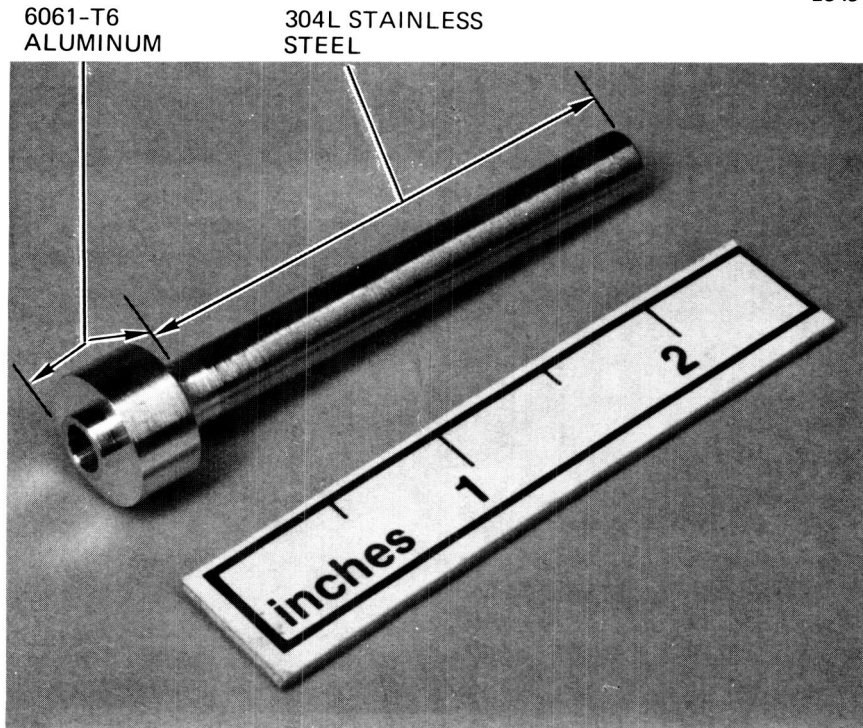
Stainless steel/aluminum transition joint fill tube.
